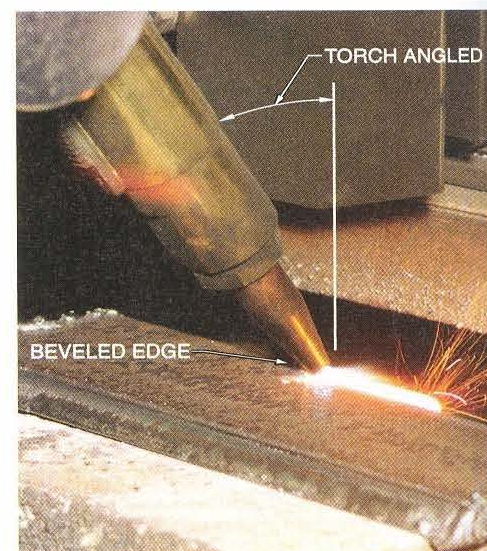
The torch must be positioned at an angle to make a beveled edge.
